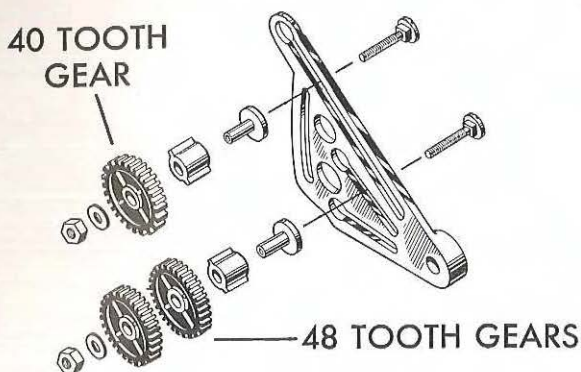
Exploded view of Gears and Studs which make up the standard Quick-Change Gear Train
